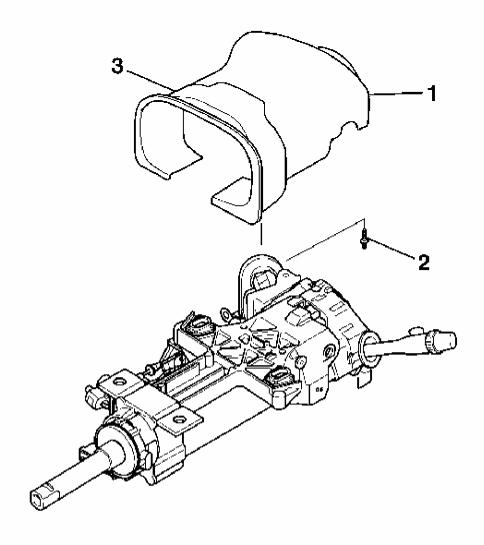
View Of Upper Steering Column Trim Cover & Screw Courtesy of GENERAL MOTORS CORP.
